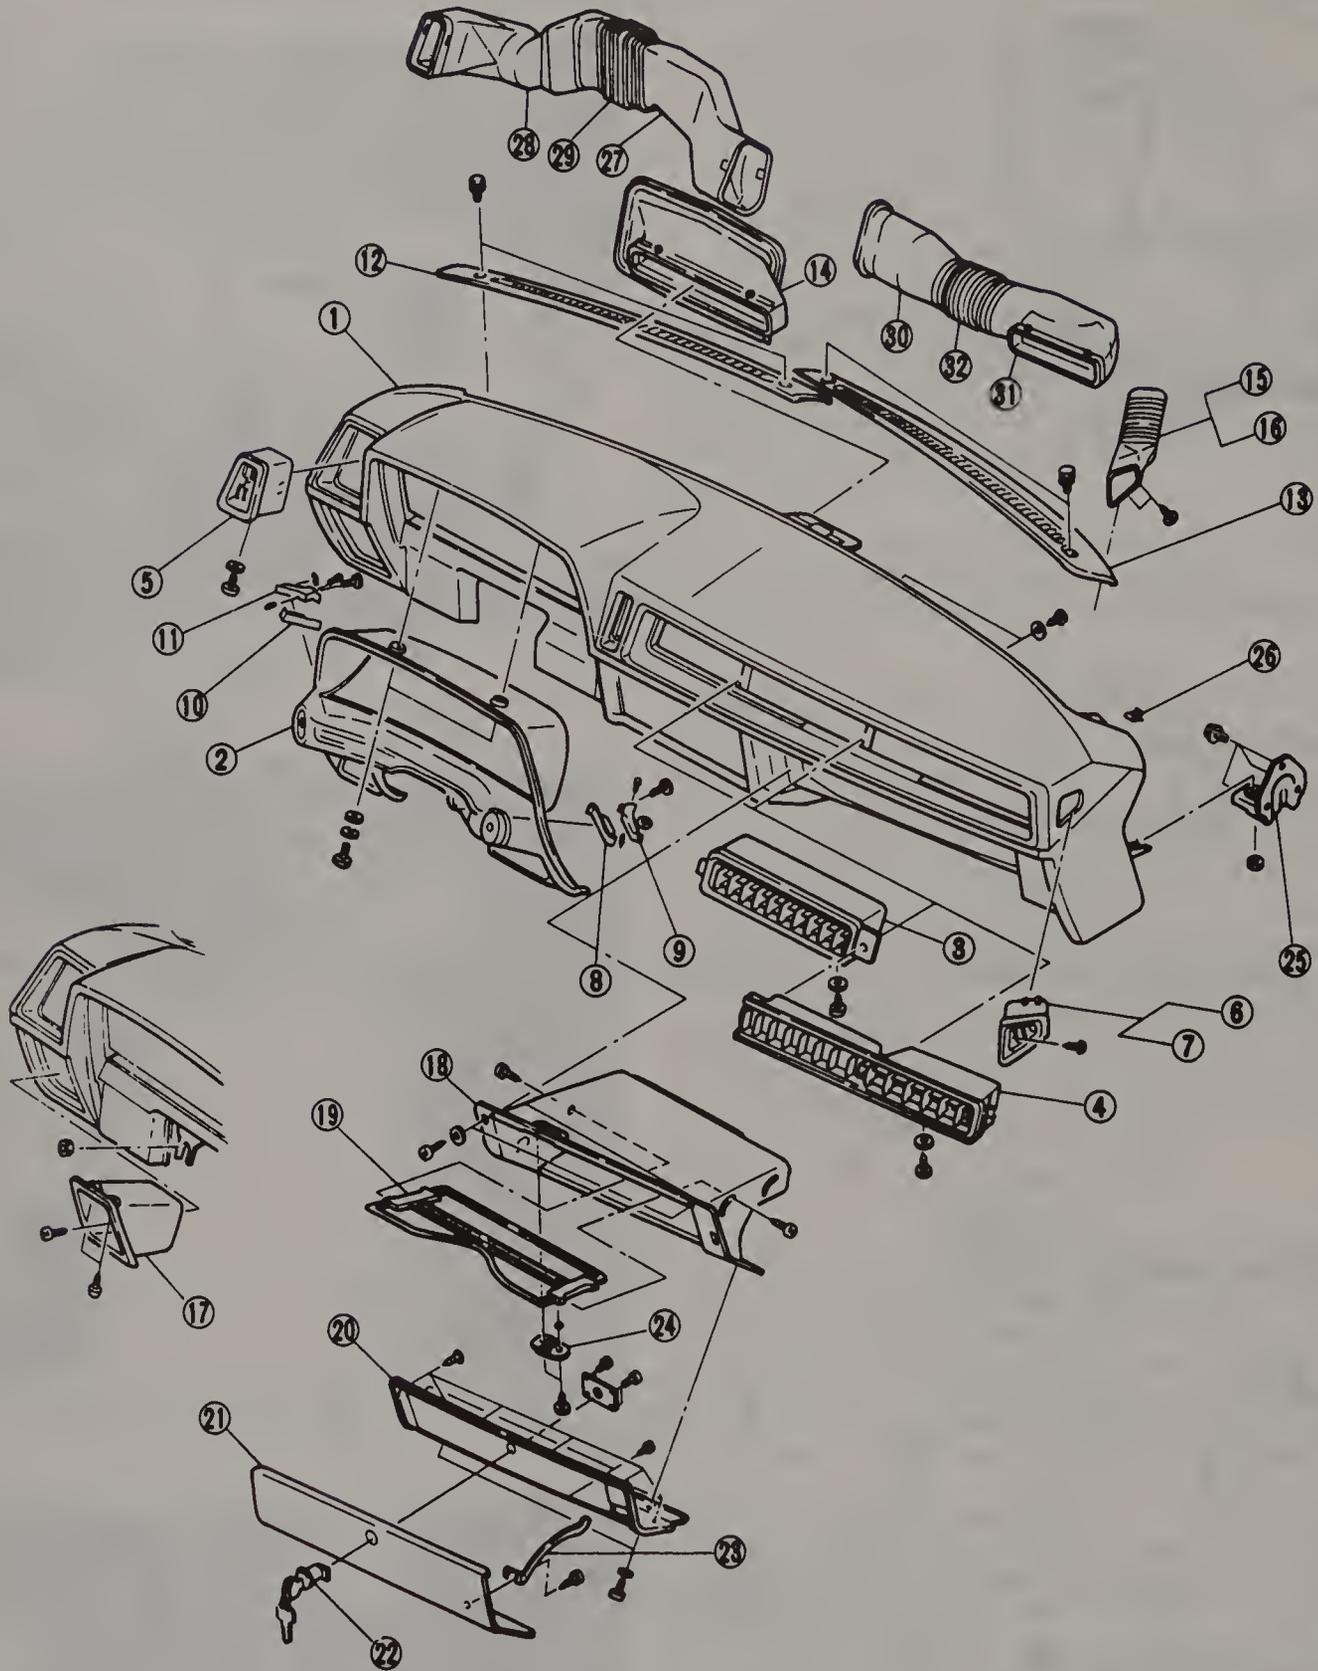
Instrument panel components – exploded view (Sec 31)
